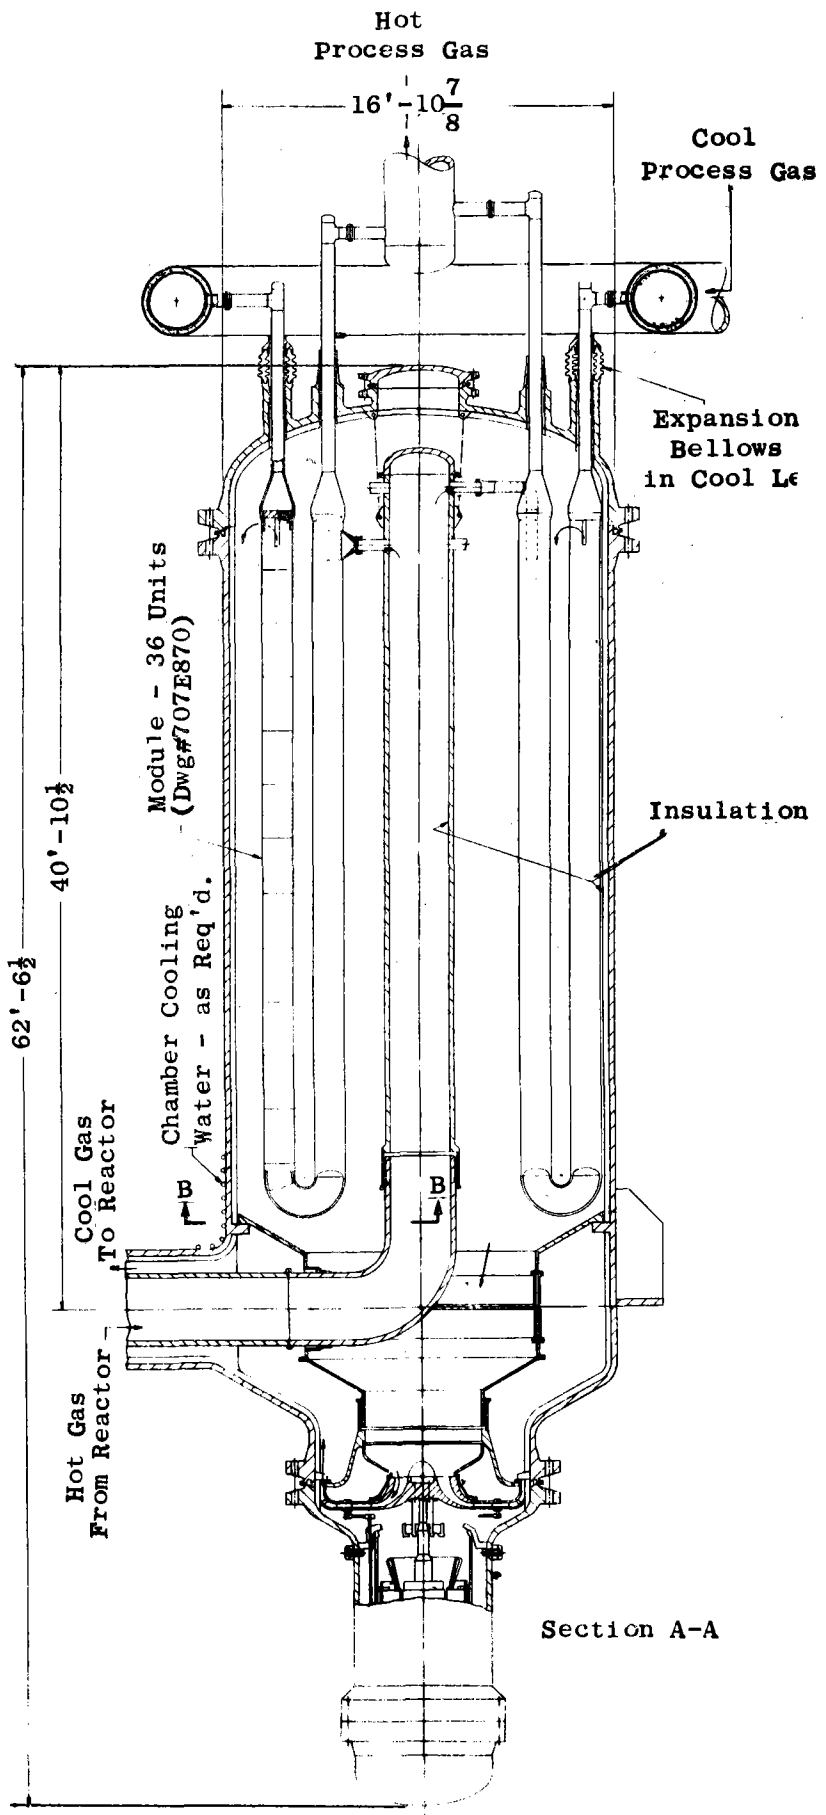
Engineering Drawing of Reference Design IHX Featuring 36 U-tube Style Modules. (Drawing No. 707E871)
